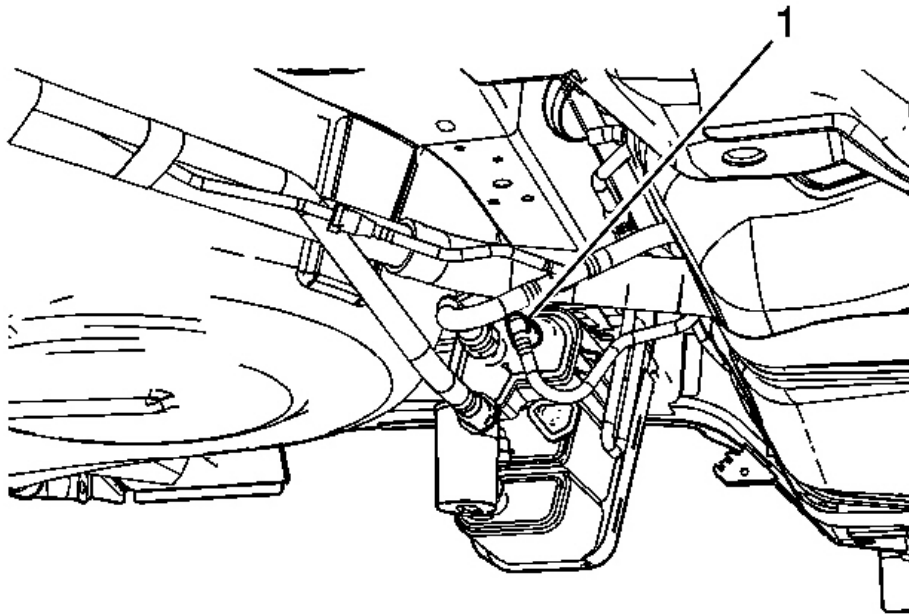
EVAP Chassis Pipe Quick Connect Fitting
